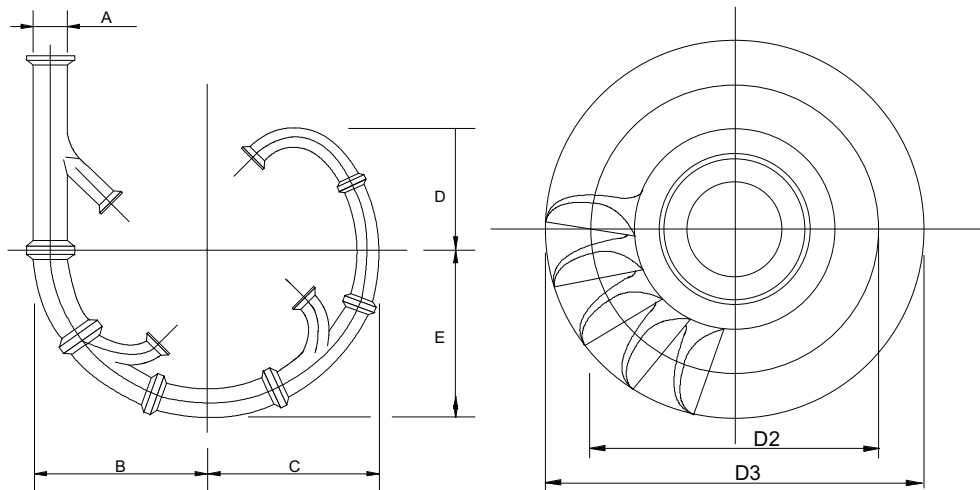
Plan of nozzles and rotor – Pelton Turbine.
